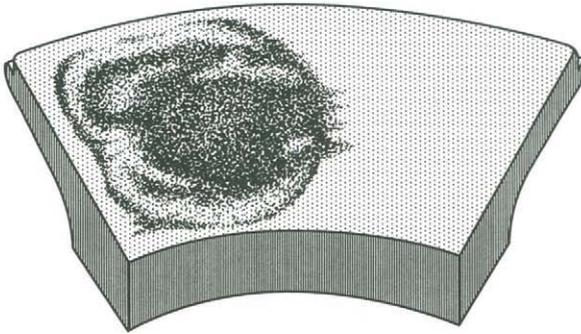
Evidence of overload on a tilt-pad self-equalizing thrust bearing pad (Courtesy of Kingsbury Corp.)
